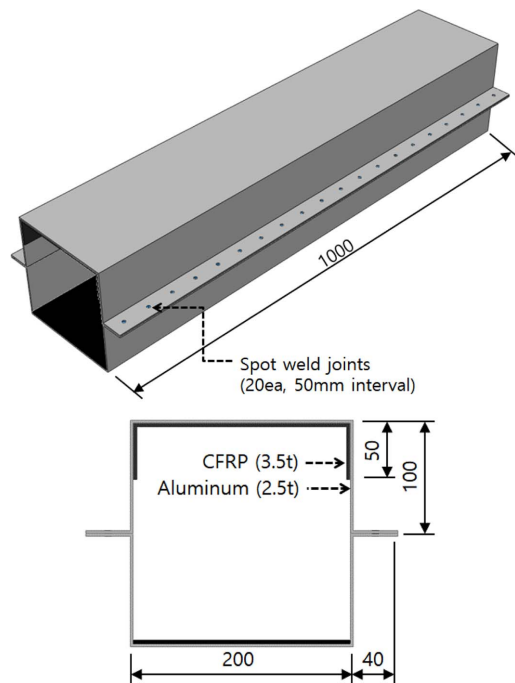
Target structures consisted of aluminum, CFRP, adhesive joints, and mechanical joints (upper: isometric view, lower: sectional view)
